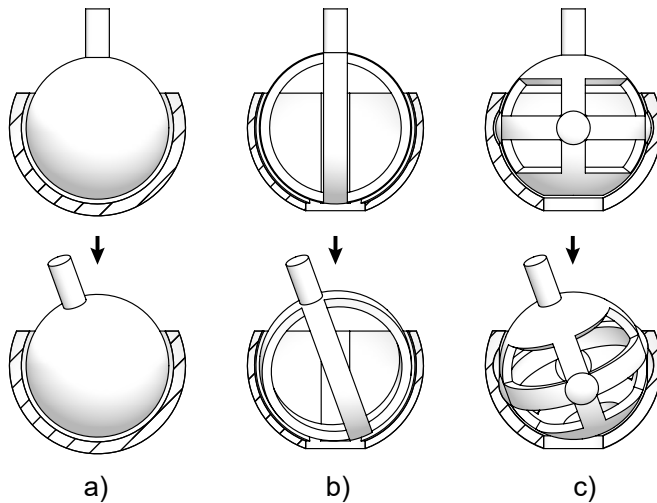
Examples of non-assembly ball joints. a) A regular ball joint. b) Design of a ball joint with open structure and ridges in order for it to be possible, adapted from [31]. c) Design of a ball joint with open structure and marker-dents in order for it to be possible, adapted from [36].
